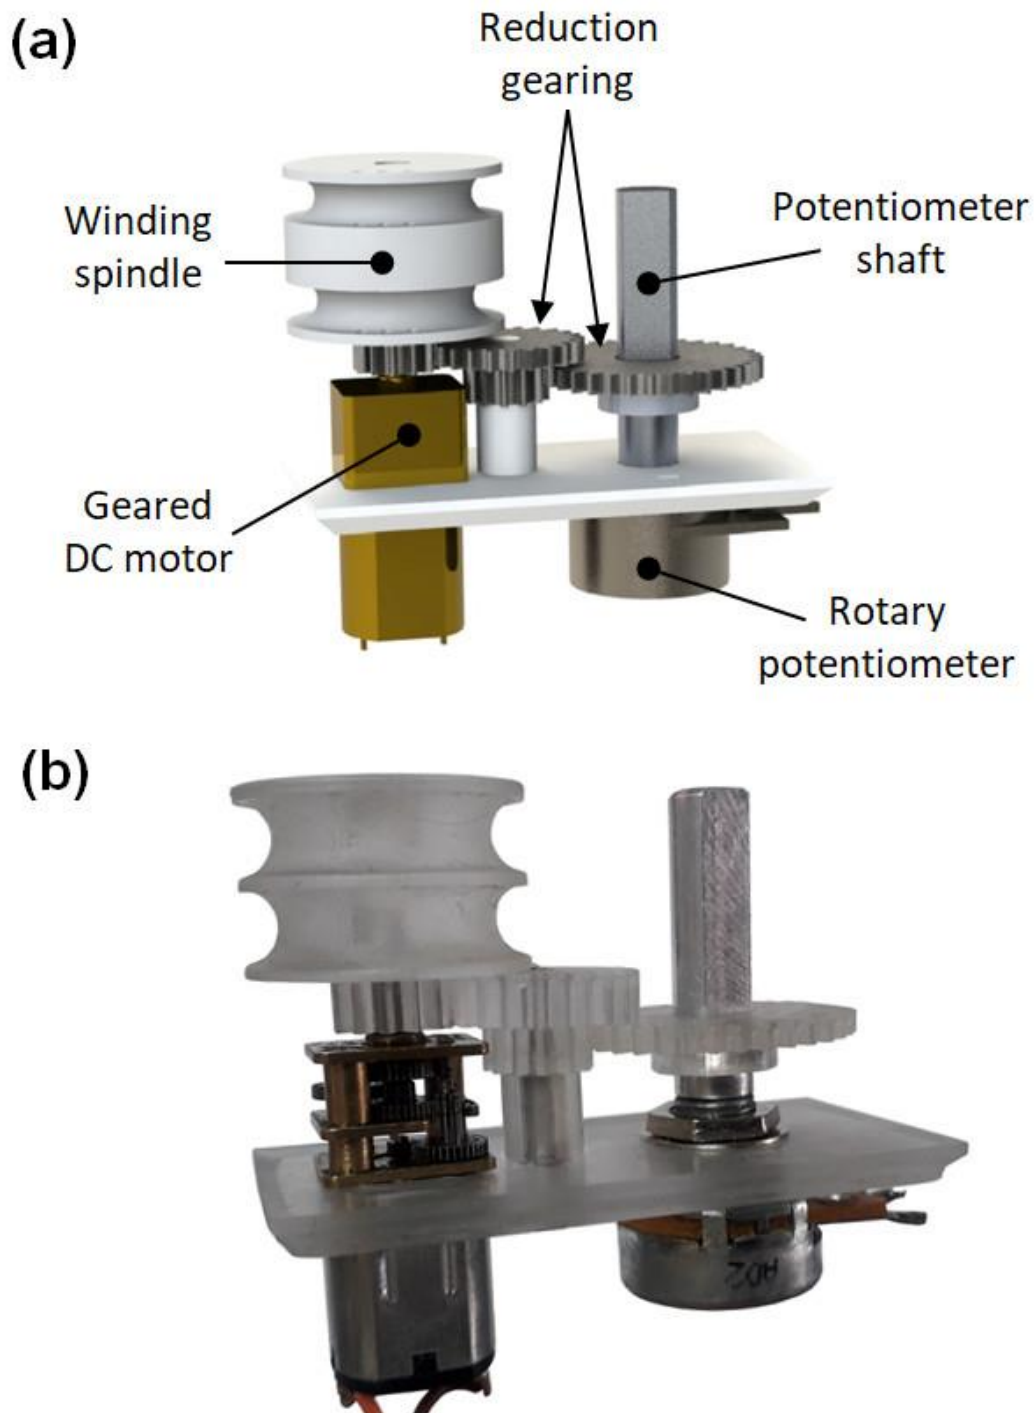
A rotary encoder that uses a potentiometer driven by gears to determine the angular displacement of the winding motor shaft. (a) Identification of the component parts. (b) Image showing a physical prototype with 3D printed winding spindle and gears.
